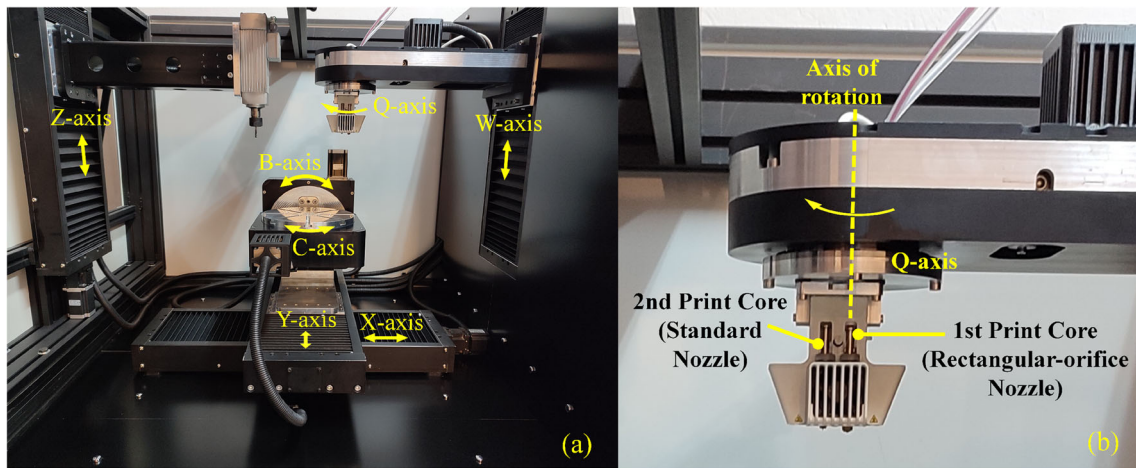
The used machine setup a motion axes, b details of the main extrusion unit
